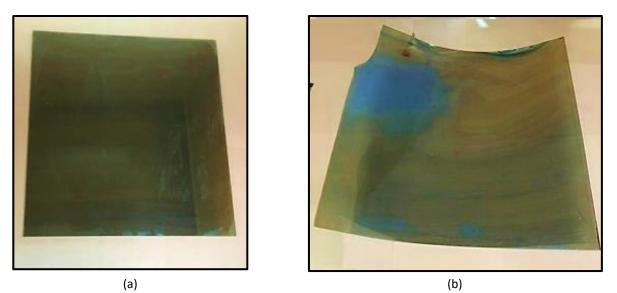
Glass sheet model (a) Flat glass before entering the furnace (b) Bending glass after exiting the furnace
